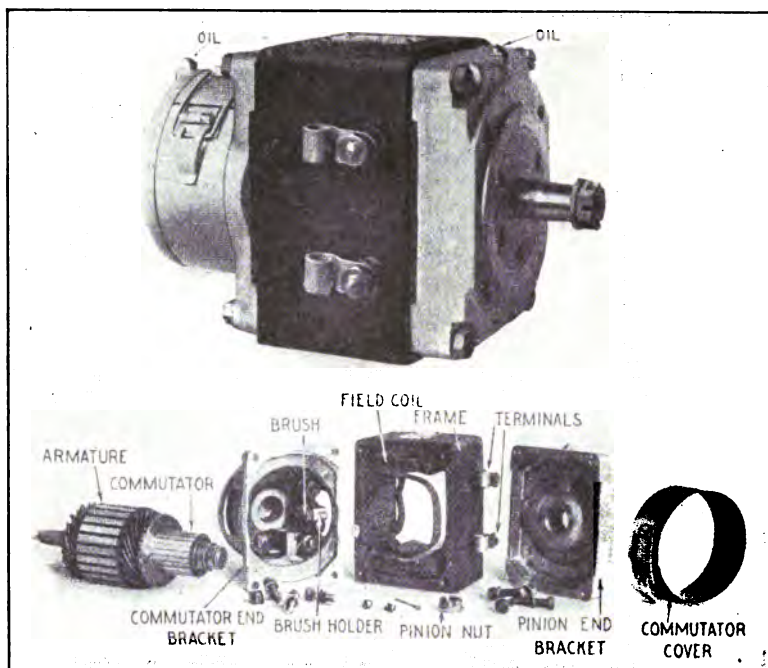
One Type of Westinghouse Starting Motor and Parts Comprising the Assembly.
